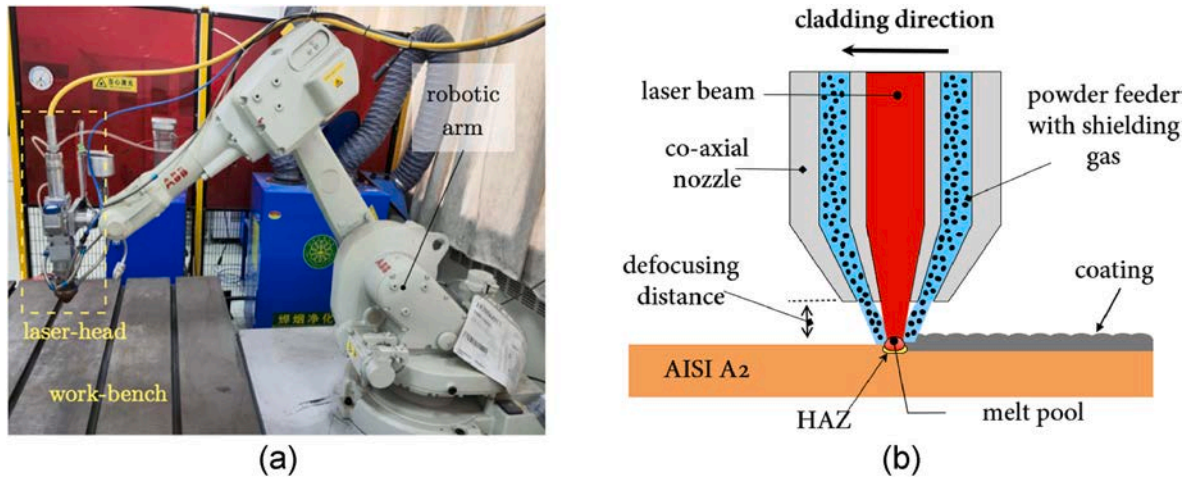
Laser cladding equipment employed in the current study. (a) Robotic arm with laser head. (b) Schematic of the laser head with co-axial powder feeder.
